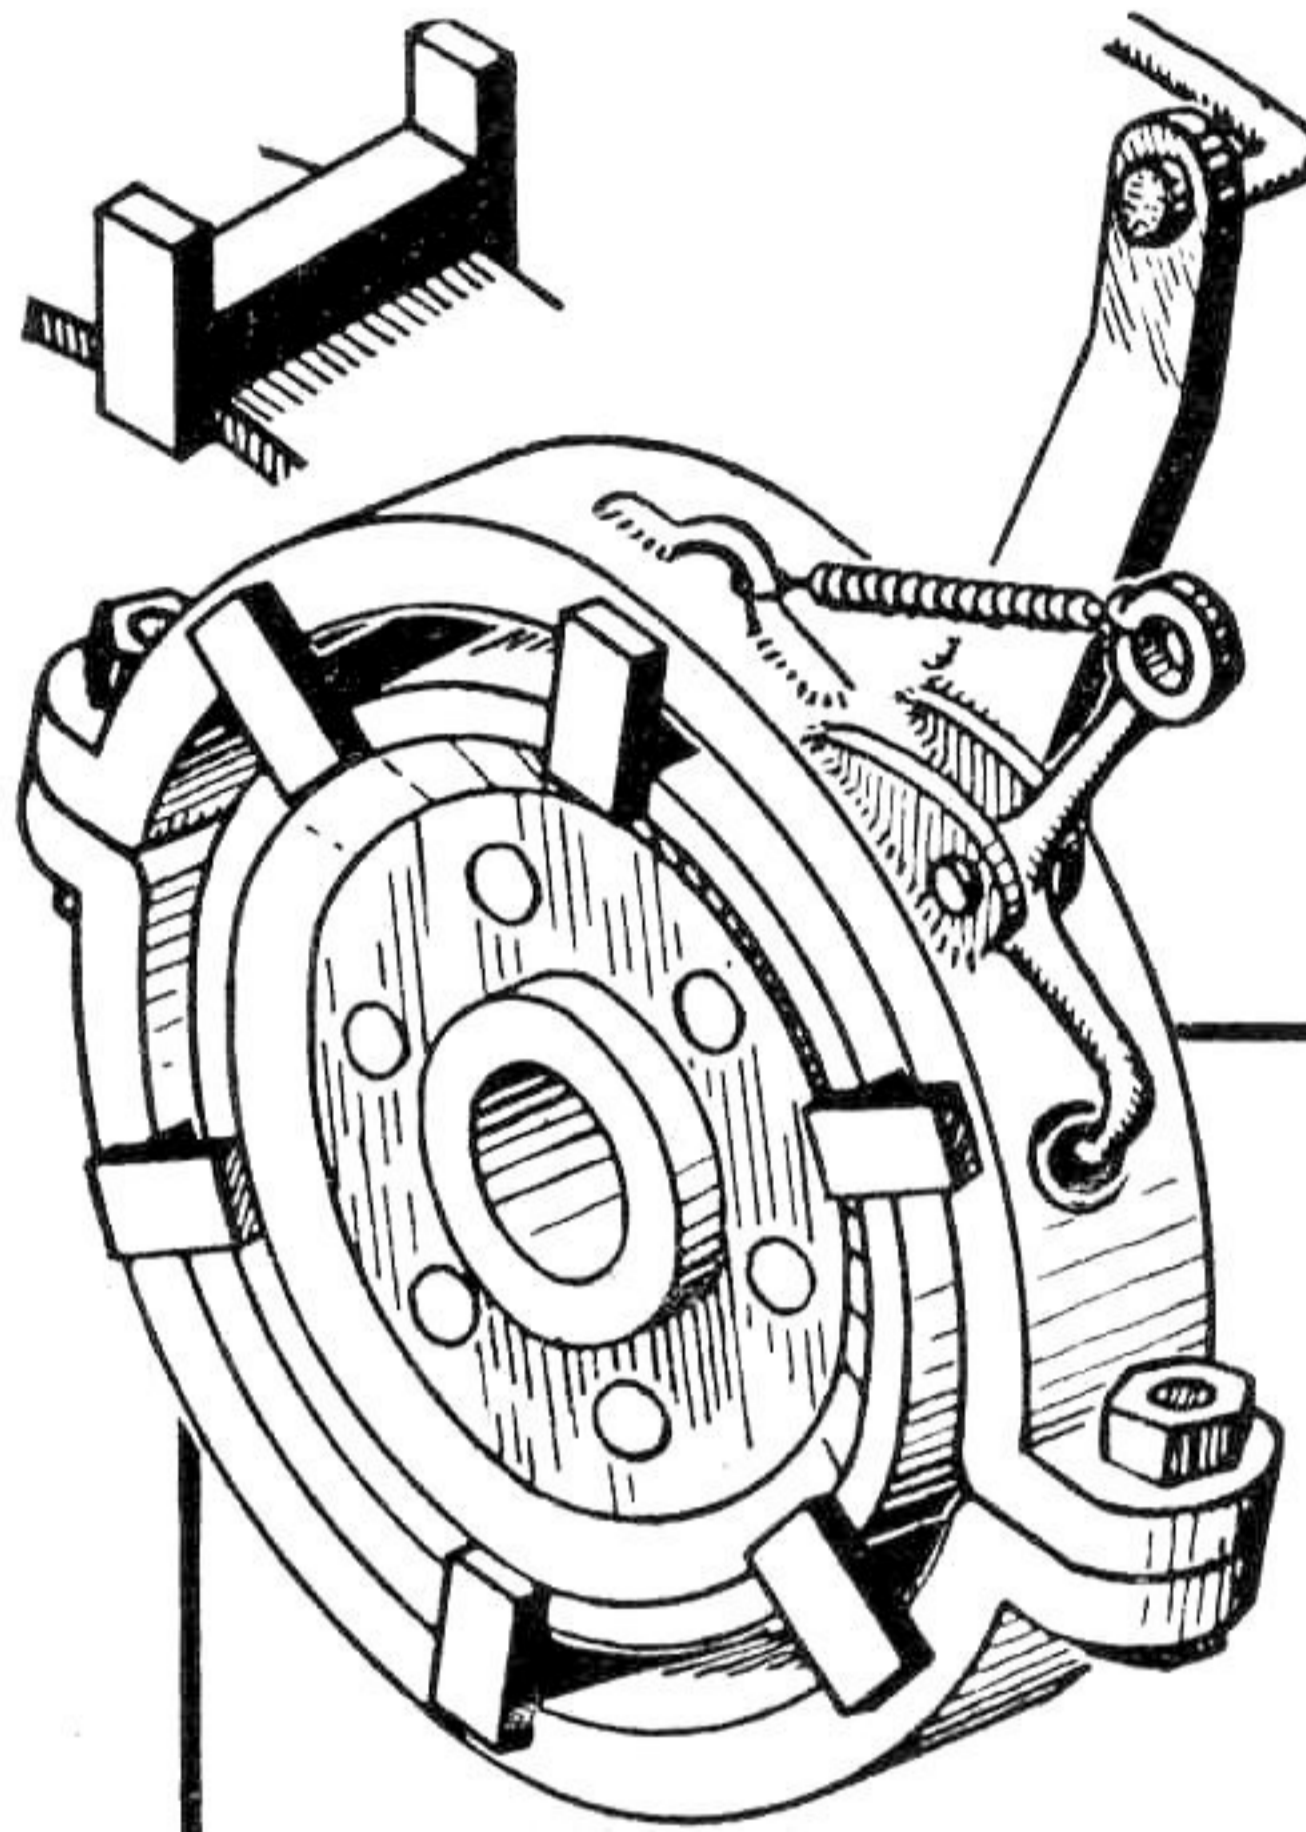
Details and perspective drawing of lifting ring, blocks and catch, all in position for operation.
